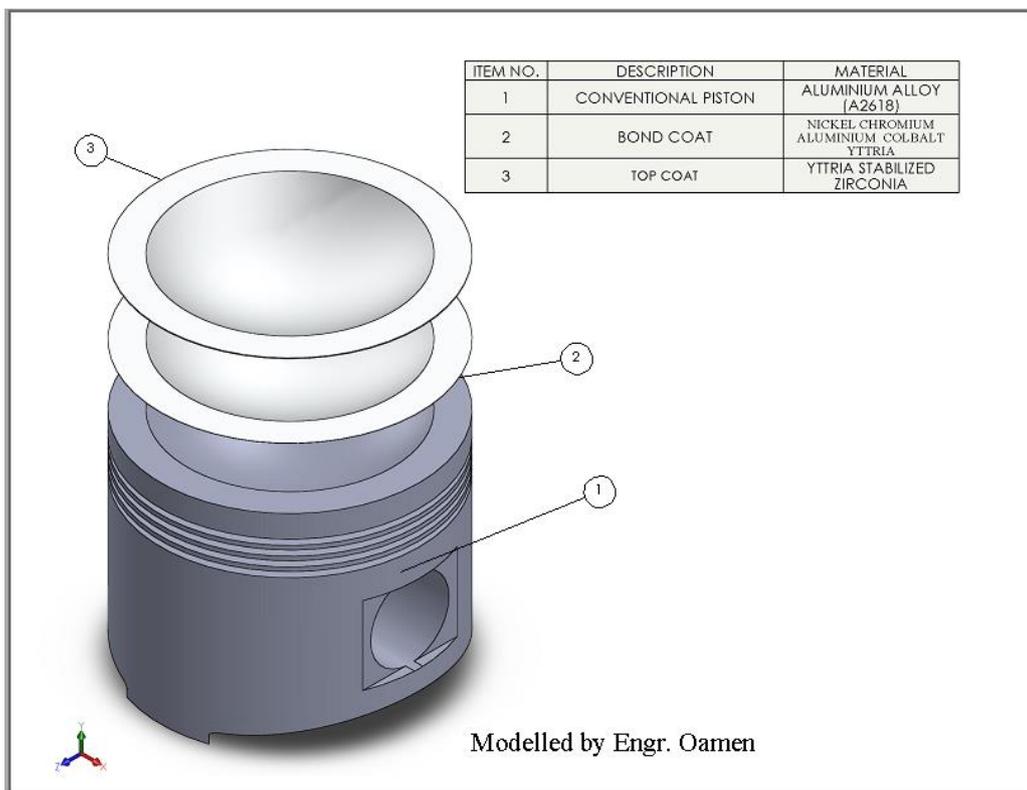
The exploded view of the reconditioned piston with bond and topcoat layers
